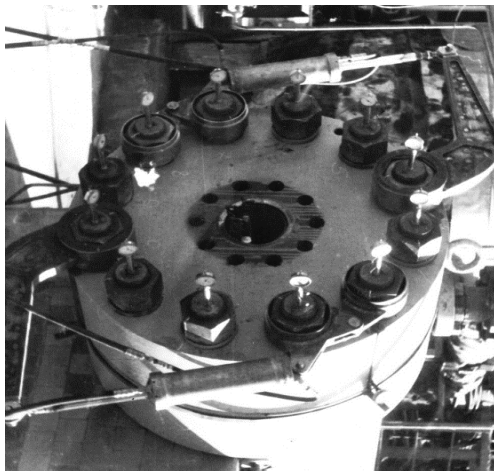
Flange connection of a cover of the smoke valve of an air heater of a blast furnace
